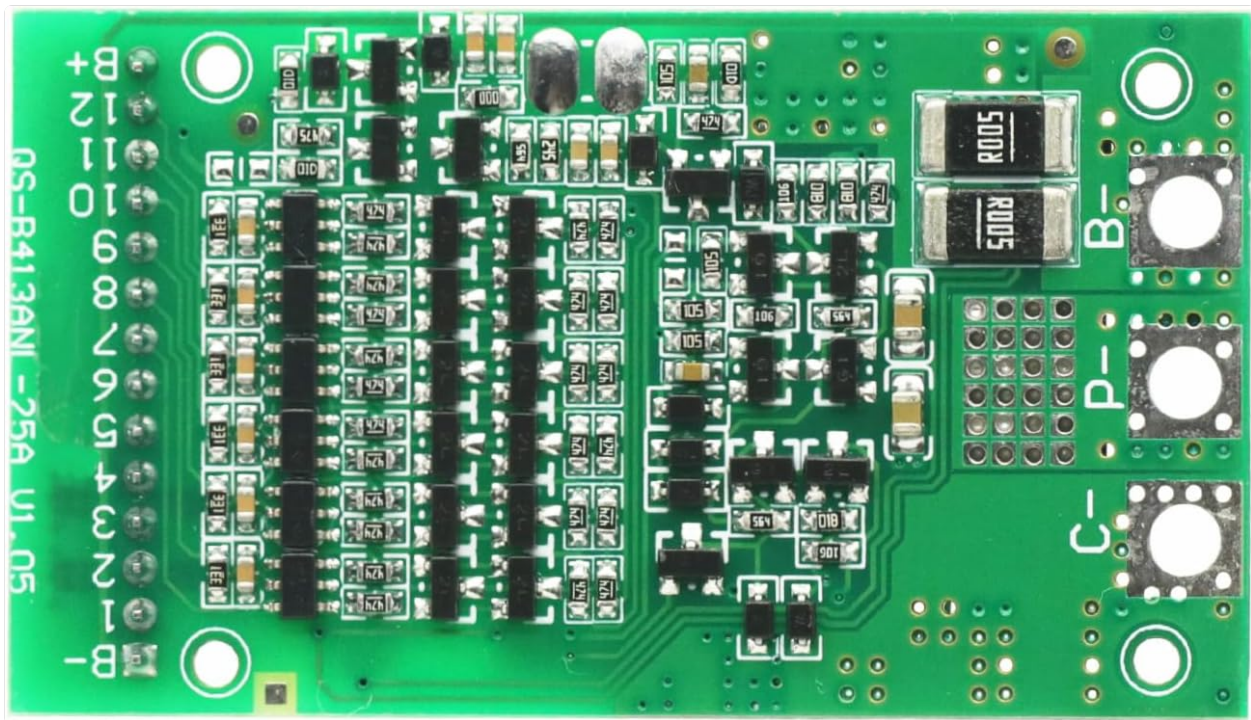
Close-up view of the BMS circuit board, showing components and connection points.
